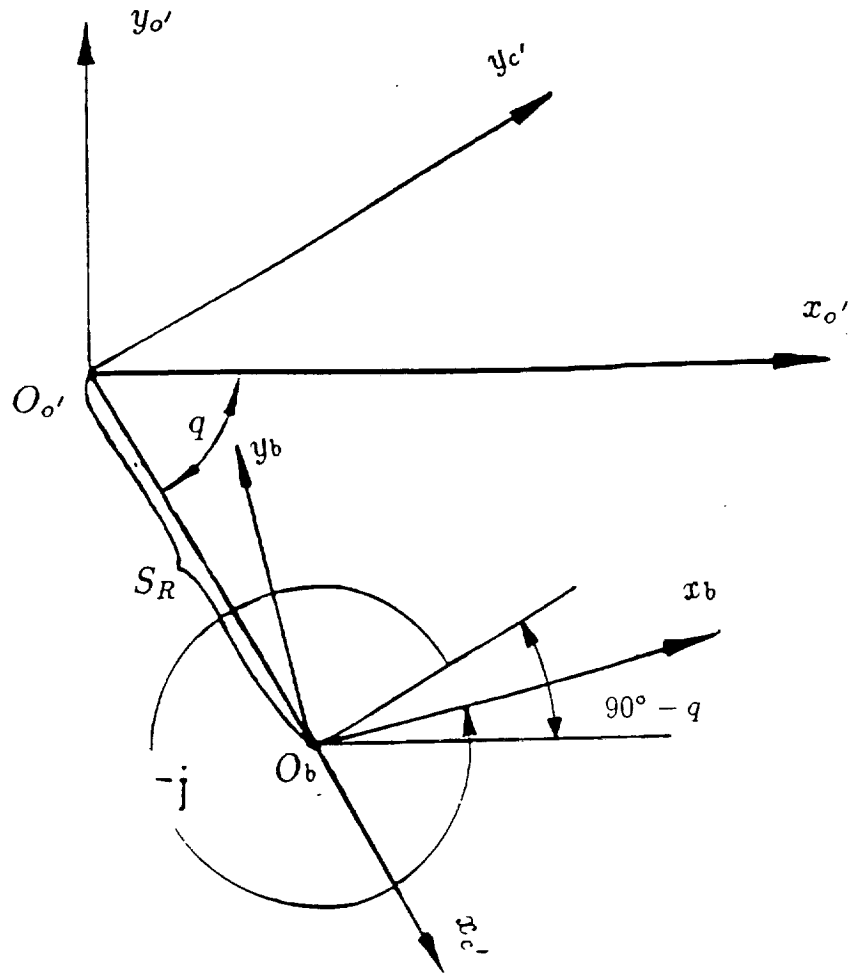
Cutting Machine and Cradle Coordinate Systems
